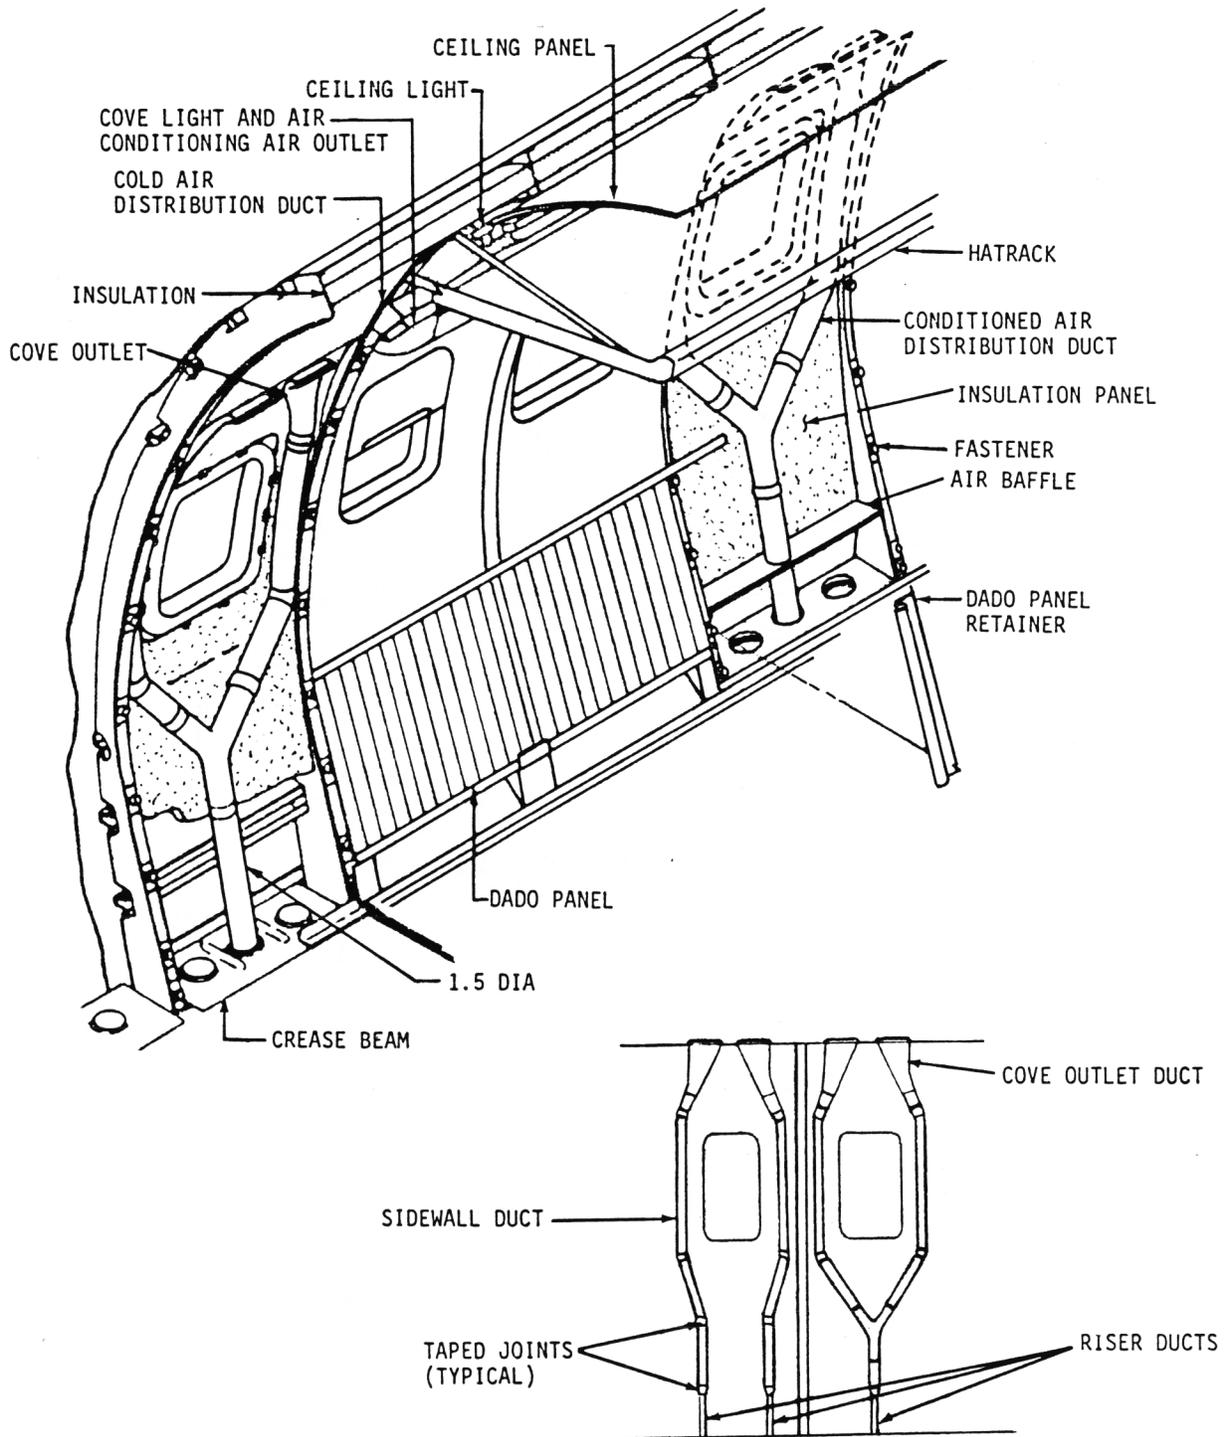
BOEING 727 SIDEWALL DUCT INSTALLATION, ORIGINAL EQUIPMENT INTERIOR
